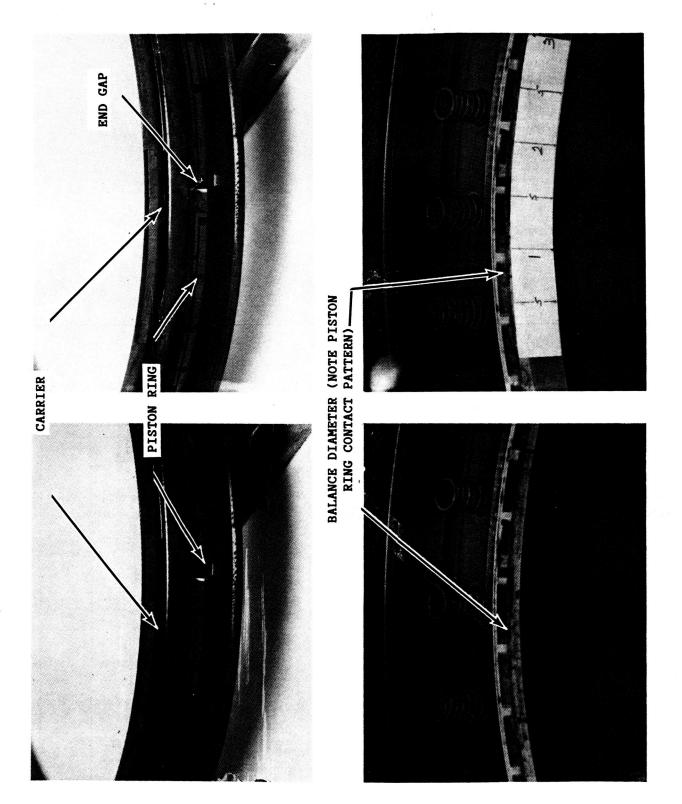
Piston Ring/Balance Diameter, After Build 22.
